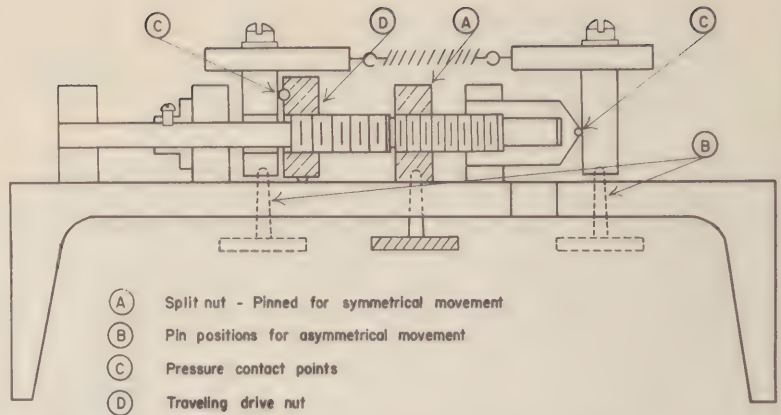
Schematic drawing of drive screw assembly. Thread Ratio-2:1
